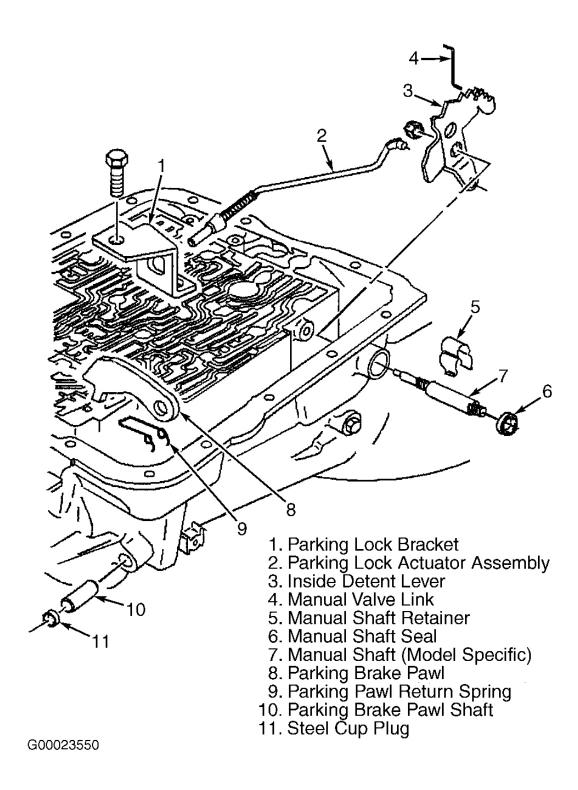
Exploded View Of Parking Pawl Components Courtesy of GENERAL MOTORS CORP.
